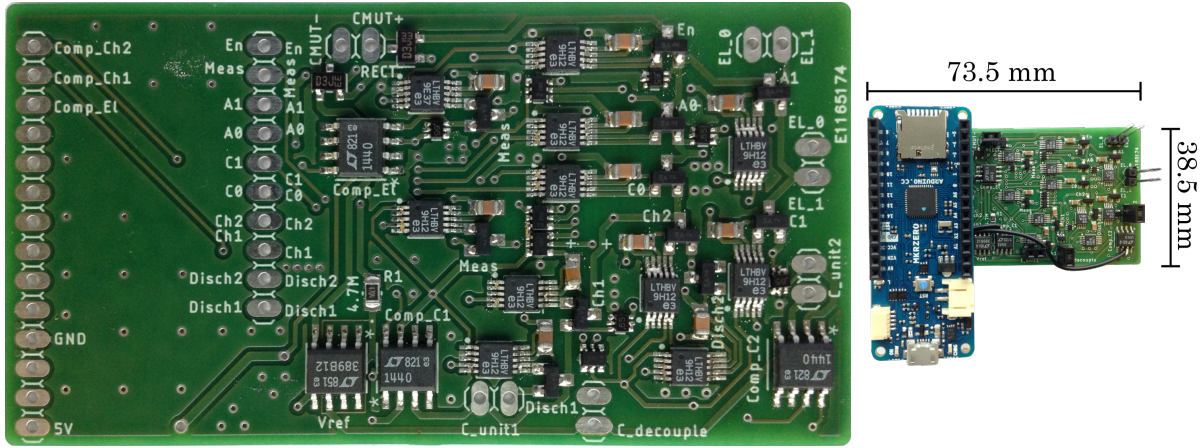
PCB with soldered components (left). PCB together with the *Arduino MKR Zero* board (right).
